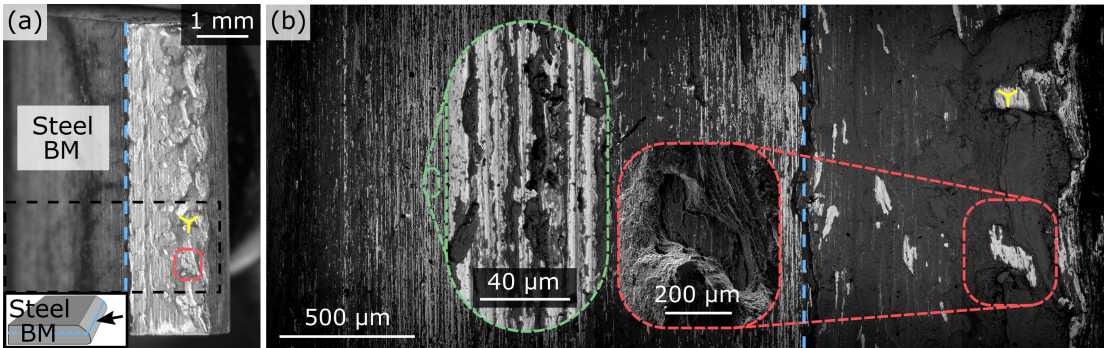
The steel fracture surface resulting from tensile testing of specimen R2. (a) Optical micrograph. The bottom inset illustrates the viewing direction, and the blue lines indicate the boarder between the top and the bottom part of the fracture surface. (b) BSE SEM image where steel appears light grey and Al dark grey. The inset outlined in green displays a SE SEM image of residual Al found on the upper part of the steel, while that in red shows a SE SEM image of a dent in the residual Al.
